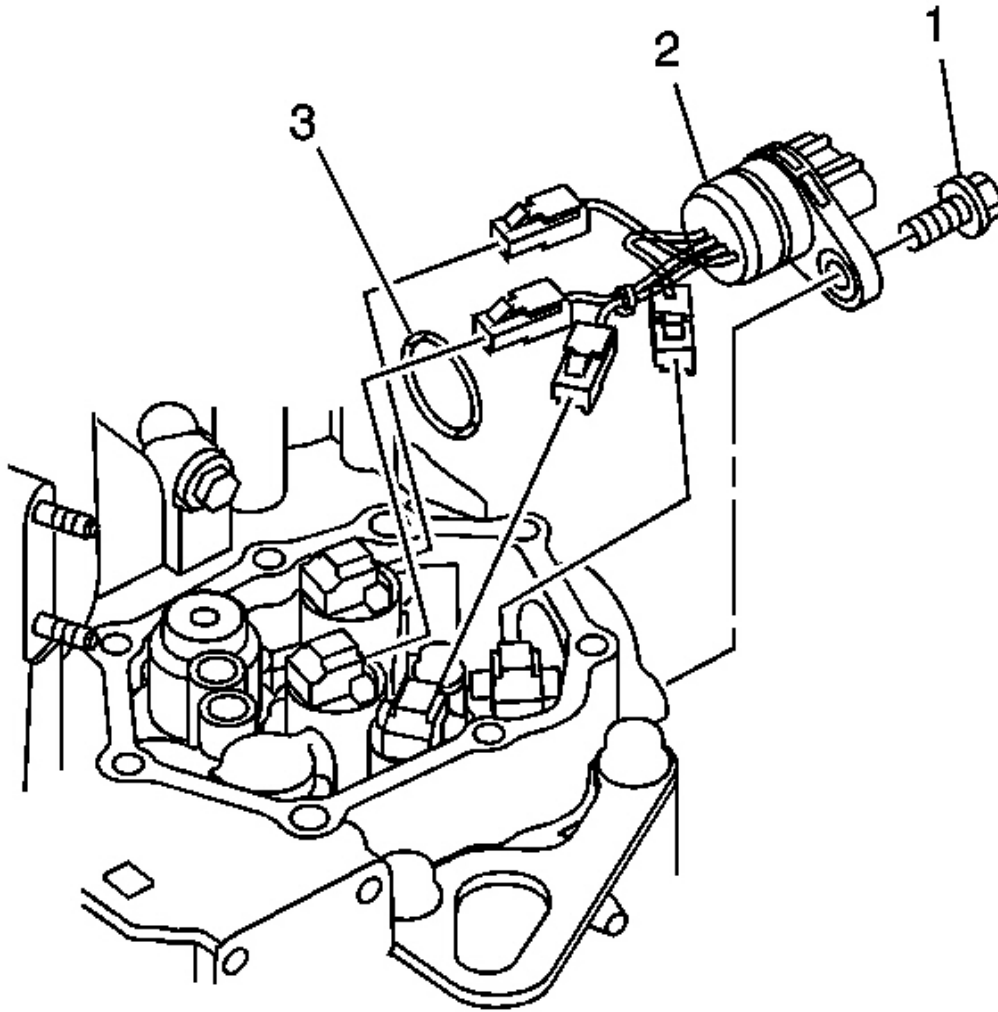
Automatic Transmission Wiring Harness, Bolt & O-Ring
